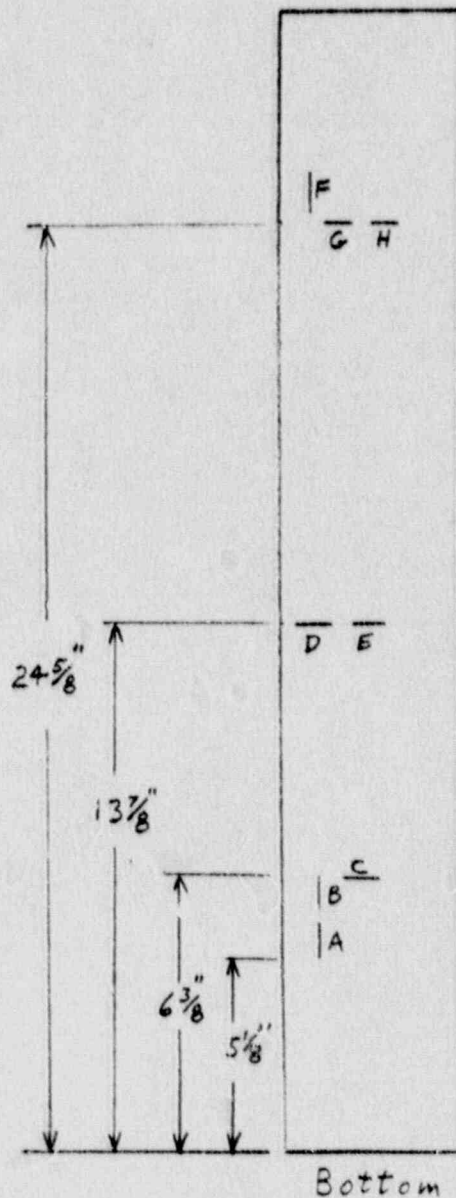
Sketch of the end cap side of the 'B' diesel 7L liner showing the locations of the metallurgical samples taken for cross-sectional examinations (part labeled B-2).
